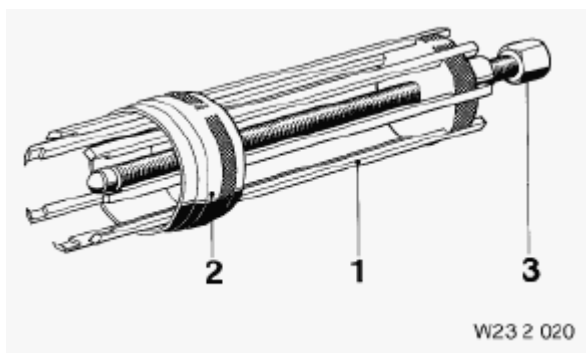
Rillex Ball Bearing Extractor (23 2 020)
